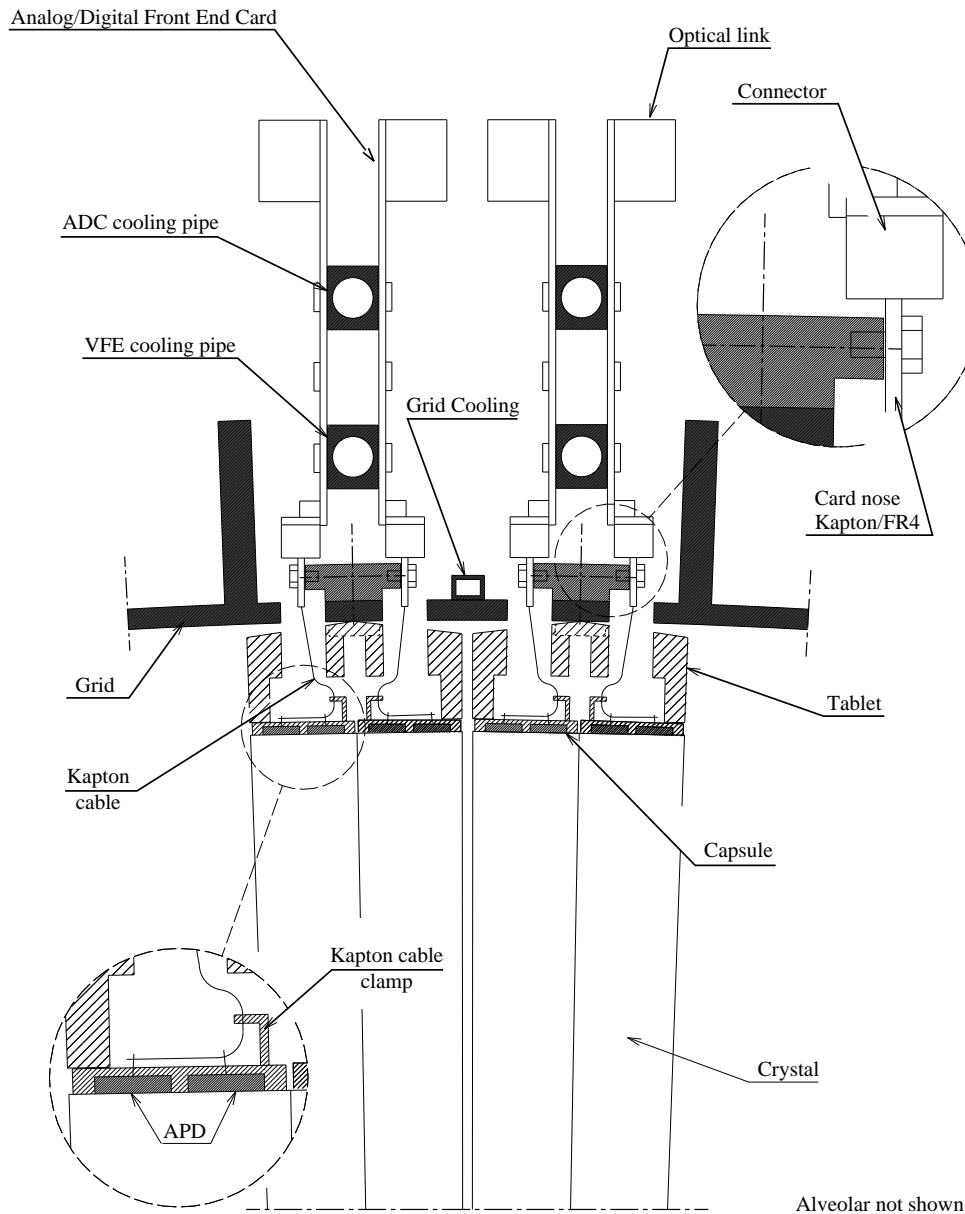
Principle of the submodule mechanical assembly (rear part).
